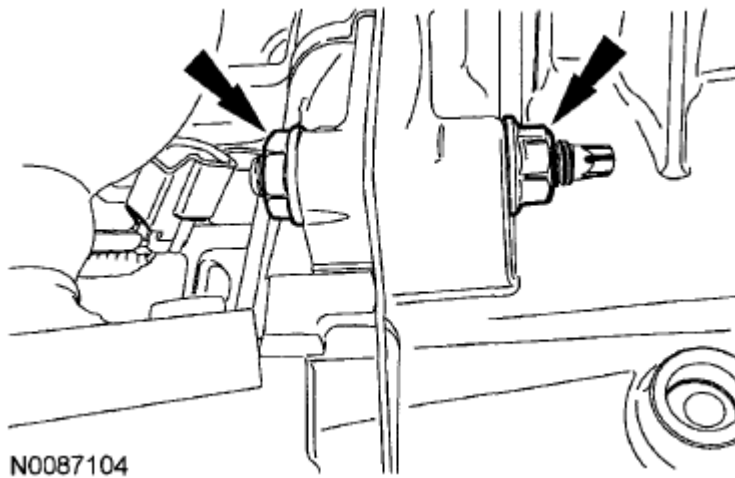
Locating Transaxle-To-Engine Stud And Nuts
